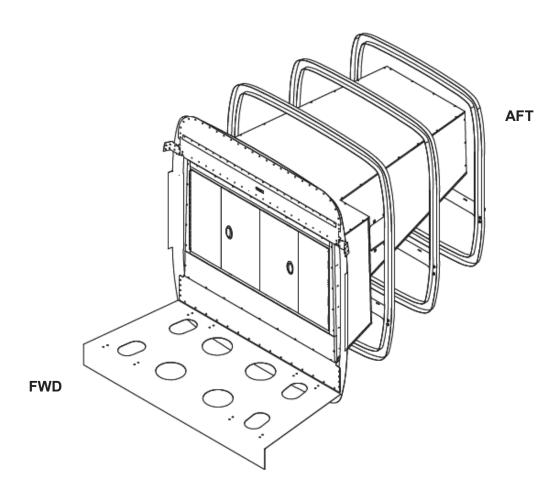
Extended Baggage Configuration -04 (see drawing 1008423)
